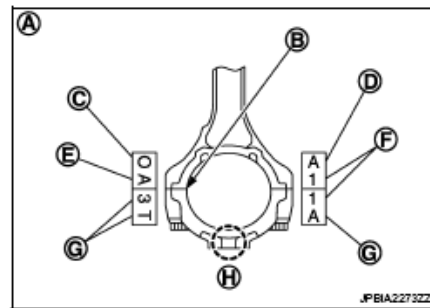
Identifying Connecting Rod Big End Diameter Grade Stamped
